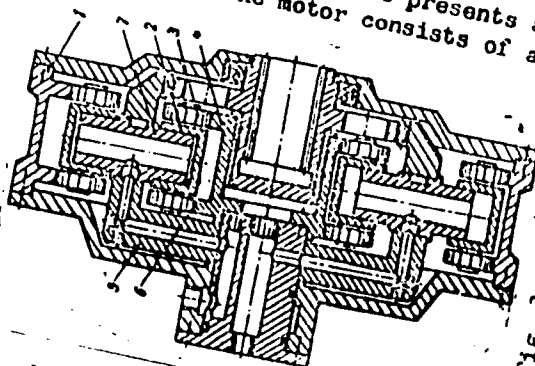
1 - casing of hydraulic motor; 2 - second piston; 3 - rollers; 4 - stator; 5 - rotor; 6 - deflector; 7 - cylinder
